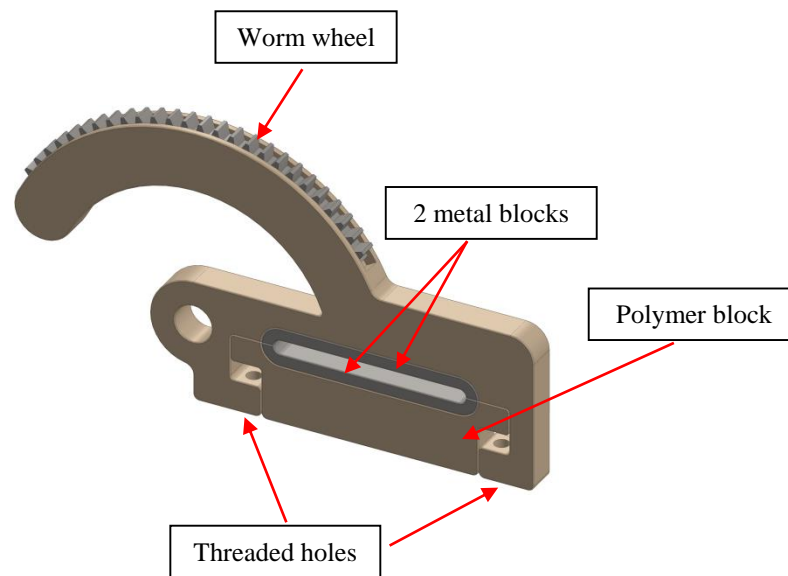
3D assembly design of the worm and worm wheel hinge movement concept design 2
